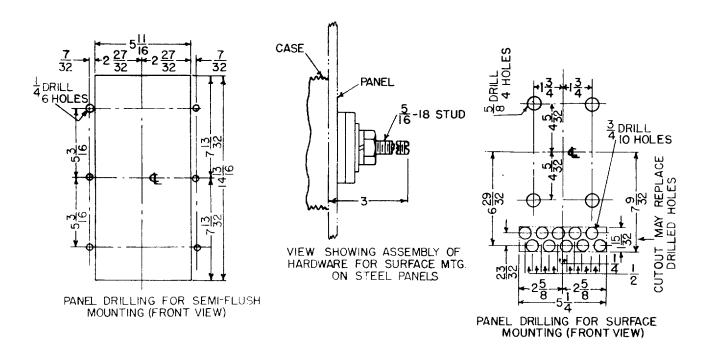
Outline and Panel Drilling Dimensions for the Type HGAI4S Relay.
